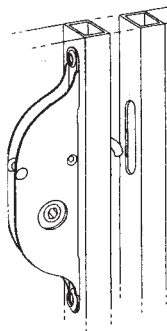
Type 1 Latch & Receiver surface mounted beneath counter panels See [TDS 36-4](#)
